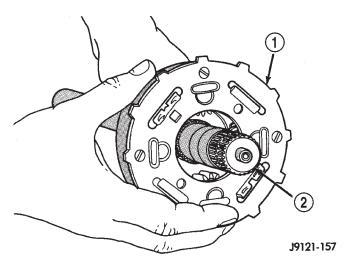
Installing Rear Annulus And Planetary On Output Shaft
